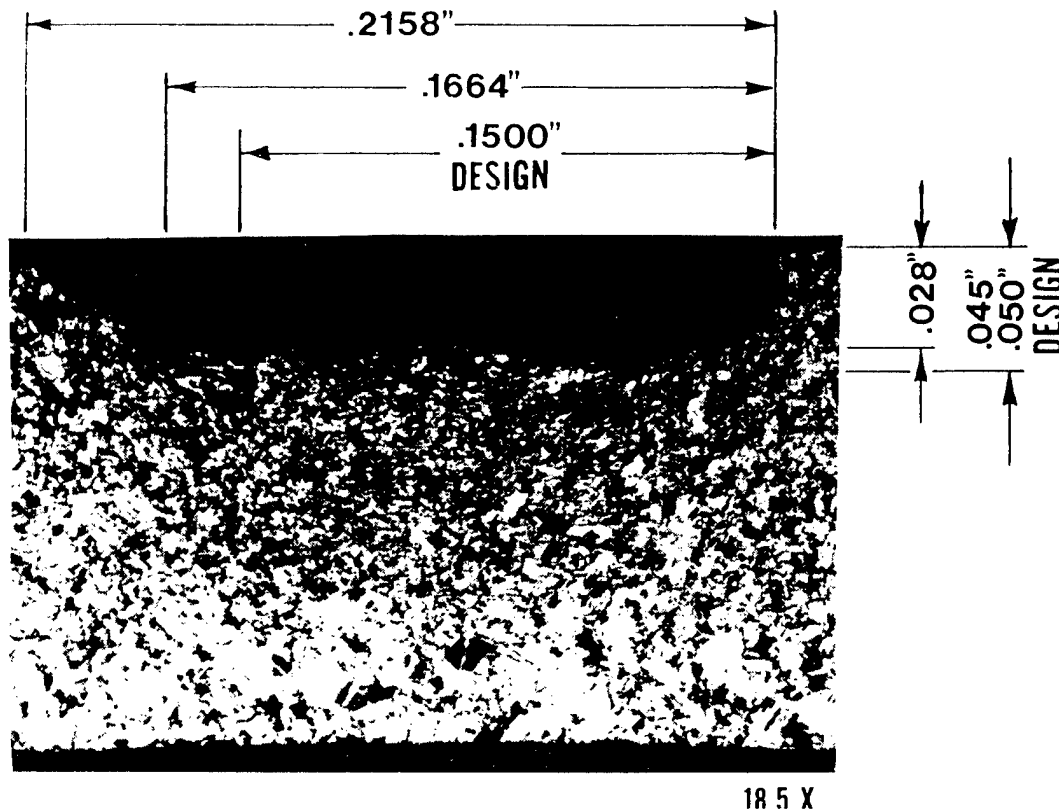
Engraved Rotating Band on a 105 MM Projectile - Transverse Section.
